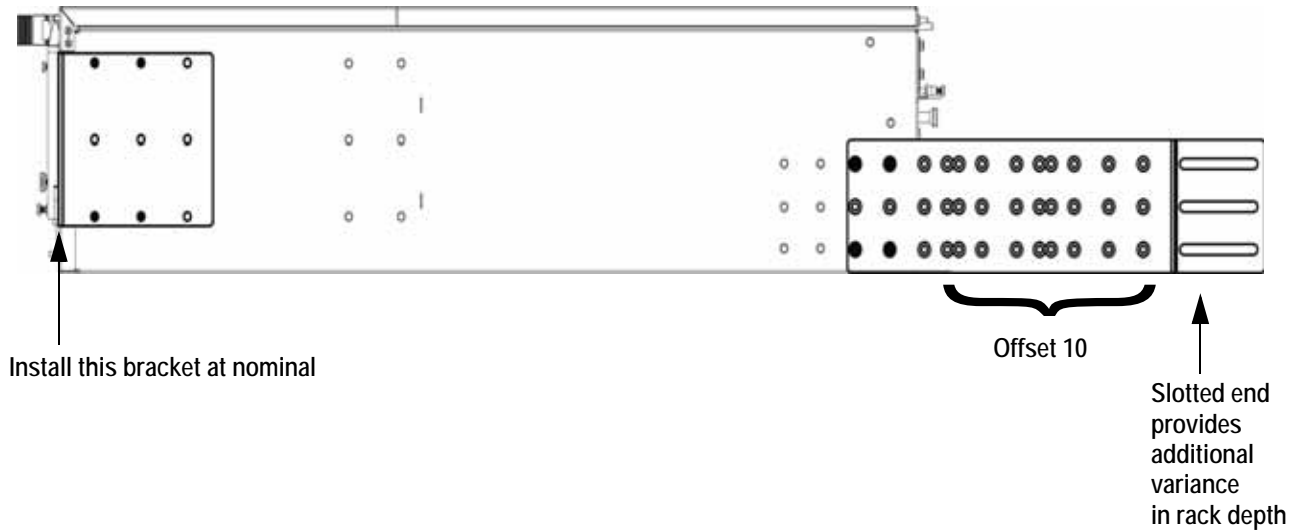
Bracket Mounting for 36.5" to 38.5" Rack
